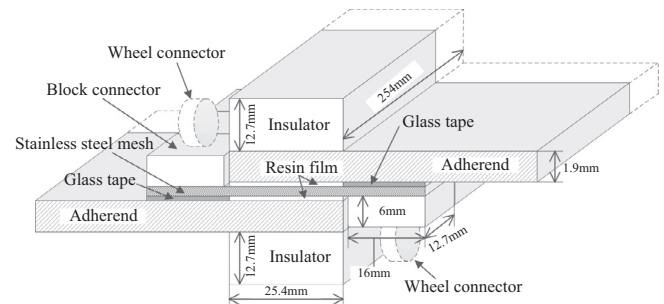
Geometry of continuous welding setup for the welding of single lap shear joint.
